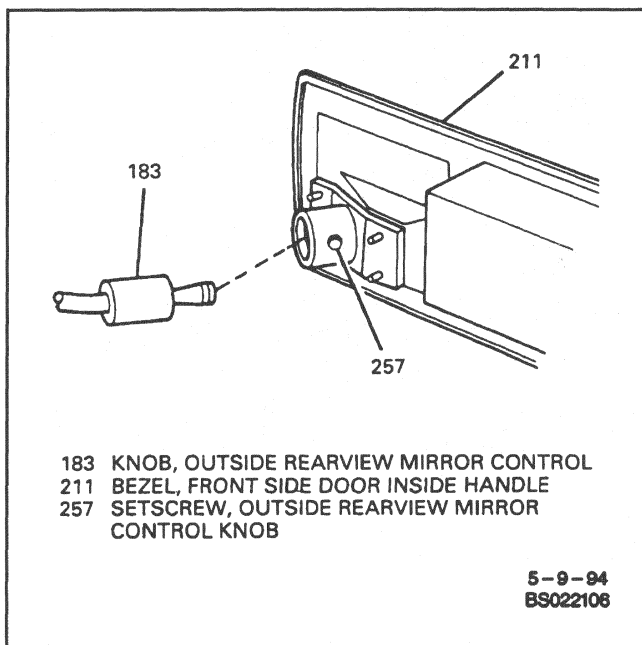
Outside Rearview Control Knob-(Chevrolet)
